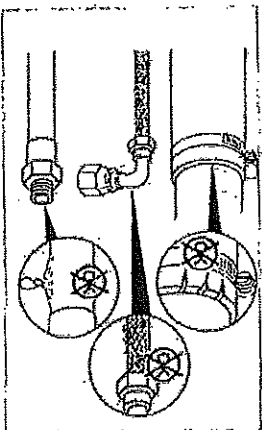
HOSES AND FUEL LINE INSPECTION
